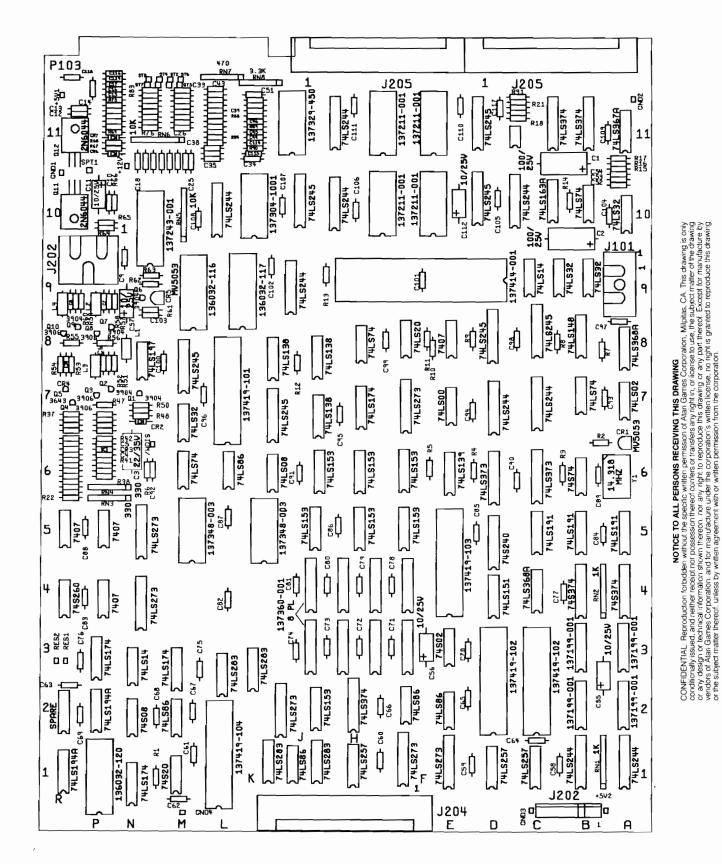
Road Blasters/Cockpit LSI Main PCB Assembly A043356-21 D
